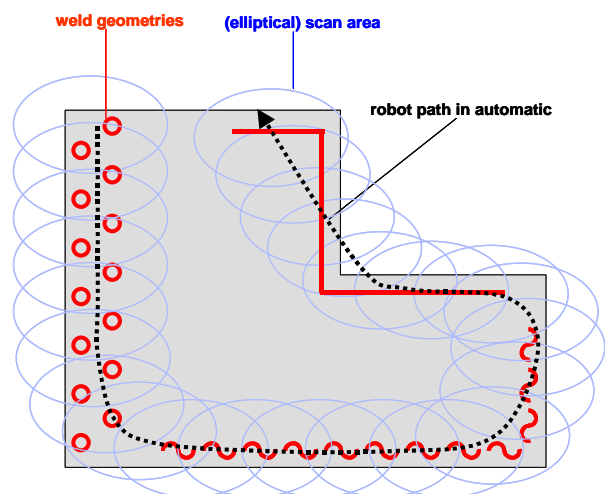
Weld geometries being generated by the PFO, while the robot moves the PFO only approximating the exact welding geometry.
